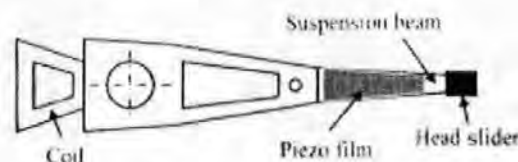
Head assembly in HDDs with bonded piezo film on one side of the suspension beam.
